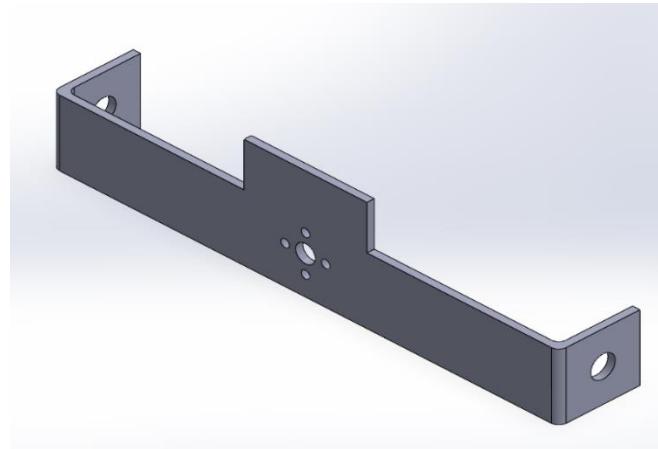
3D Model of Scissor Mechanism Attachment
